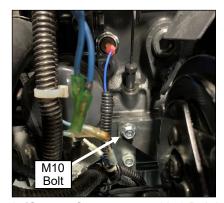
(Secure Compressor with 1 Bolt in Front)
